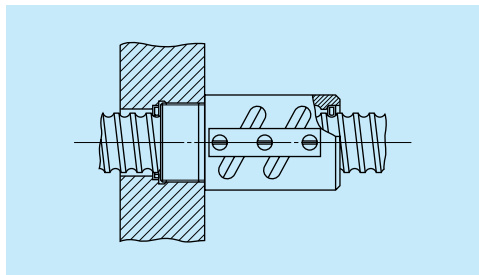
Installation of brush-seal to a ball nut with thread screw
